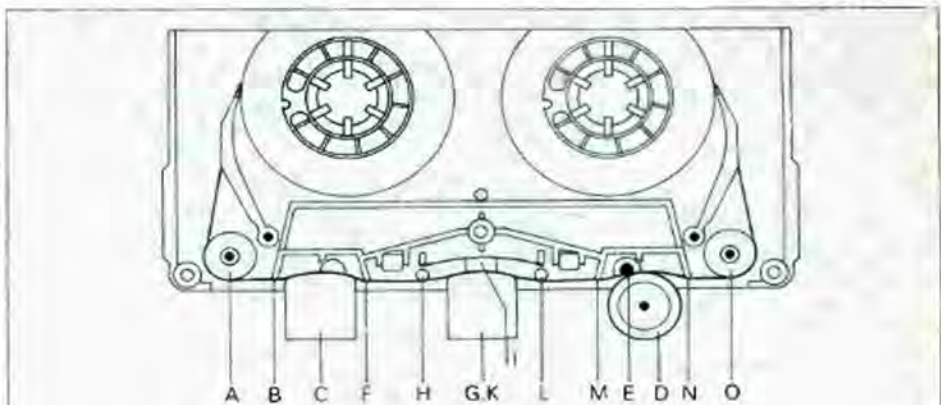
Tape path and C-0 components. A = left roller and axle; B/F = left stay guides; C = erase head; D = pinch wheel; E = capstan; G/K = record/play head(s); H/L = pin guides; I = pressure pad and spring; M/N = right stay guides; O = right roller and axle.
